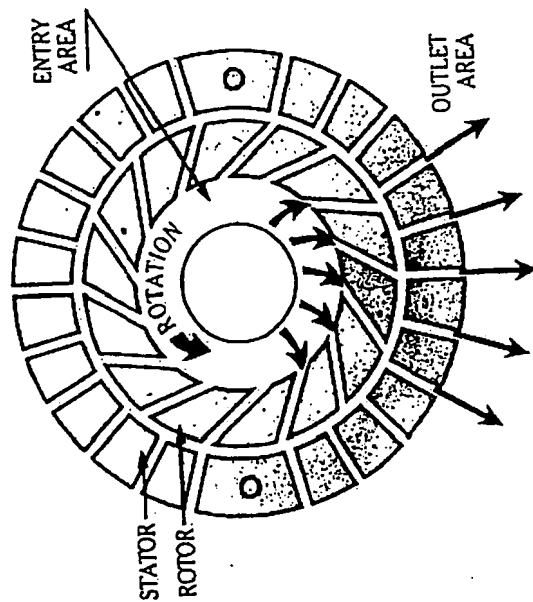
A Kady mill rotor and stator. (Courtesy of the Kinetic Dispersion Corp.)
